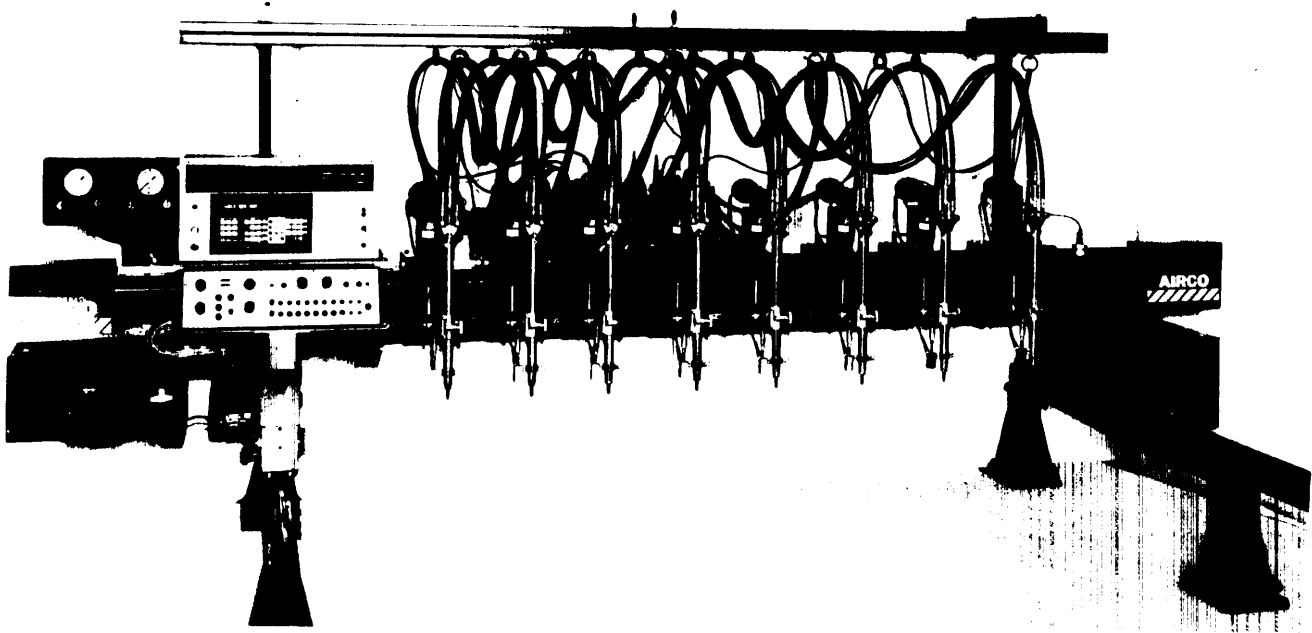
Three-axis, gantry-type thermal cutting machine. (AIRCO Welding Products)
